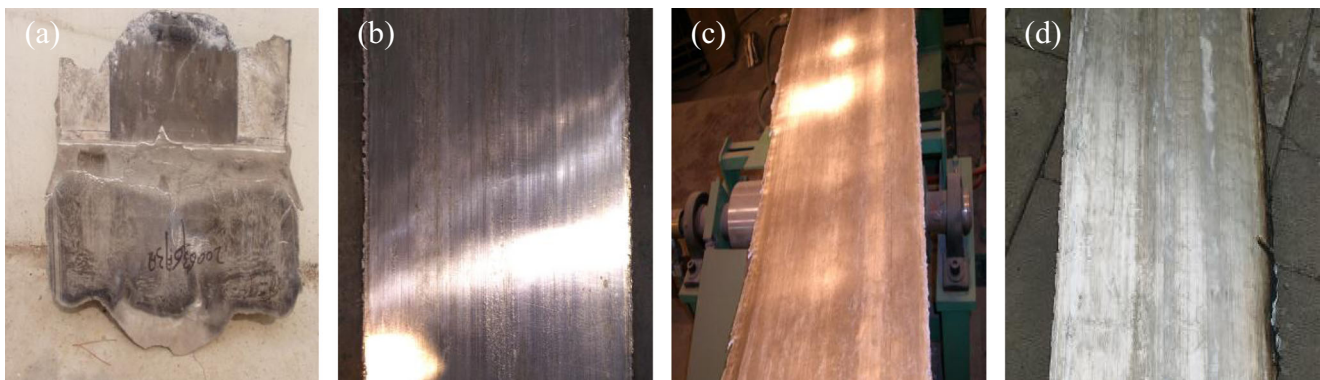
Strips of AZ61 alloy by twin-roll casting at a 680, b 710, c 720, and d 730 °C
